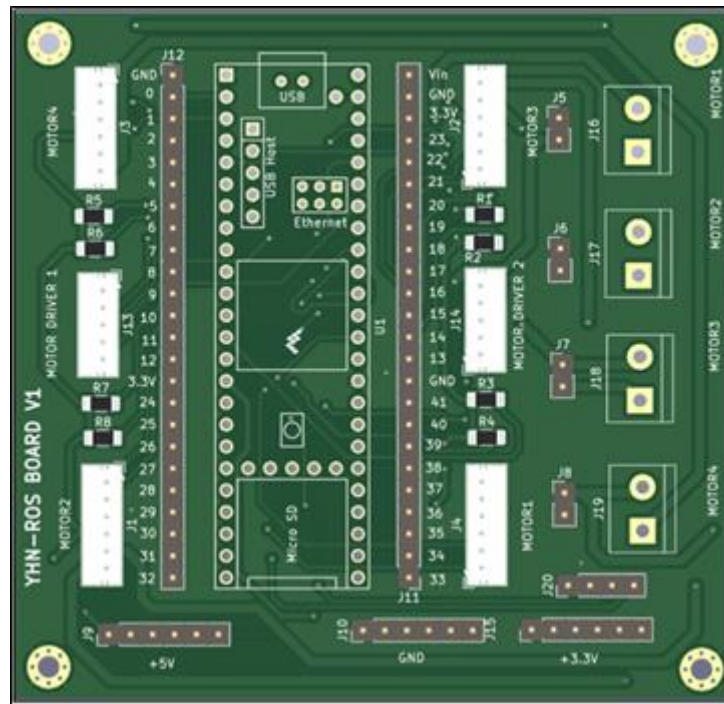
3D View of YHN-ROS Board Created Using KiCad.
